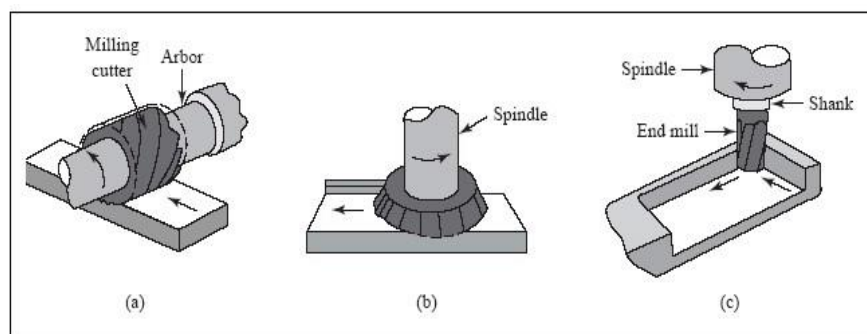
The three basic milling operations: (a) milling, (b) face milling, (c) end milling
